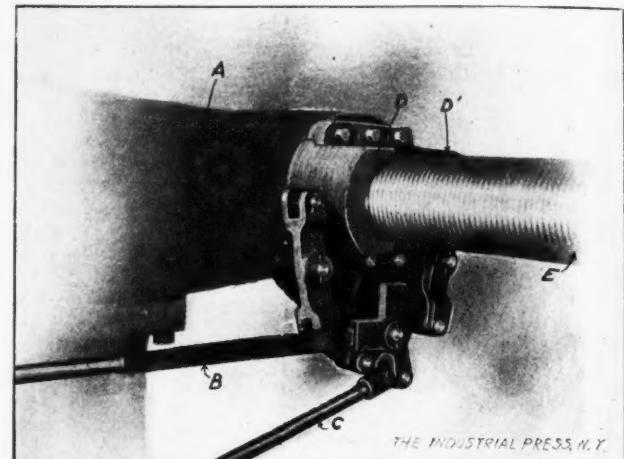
Detail of Split Nut in Hydraulic Press Yoke.
